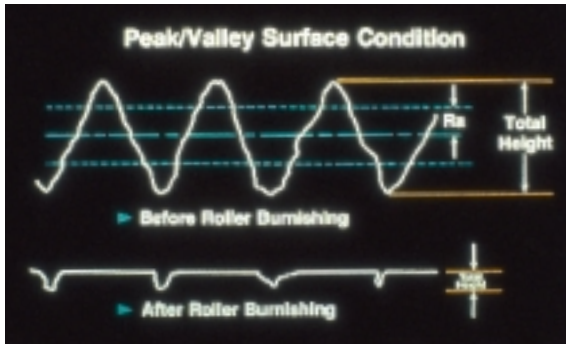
A comparison of a workpiece surface's peaks and valleys before and after roller burnishing.
